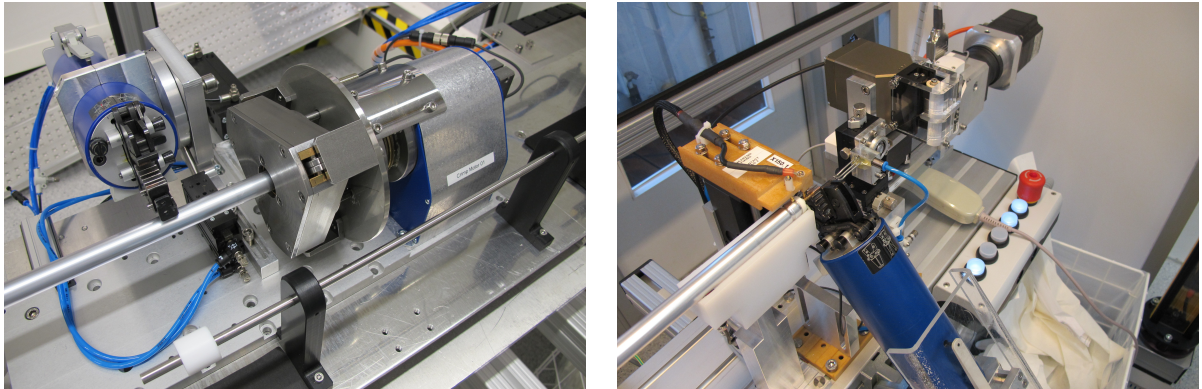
Automated tools for the mechanical swaging of the aluminium tubes onto the O-rings on the endplugs (see Figure 8) for fixation and gas sealing (left) and for crimping of the sense wire in heat-treated copper crimp tubelets inserted into the central brass pins of the endplugs (right). This operation takes place after the feeding of the wire through the tube by air flow, without manual interference, and after automated tensioning of the wire using a stepping motor controlled by a strain gauge (right).
